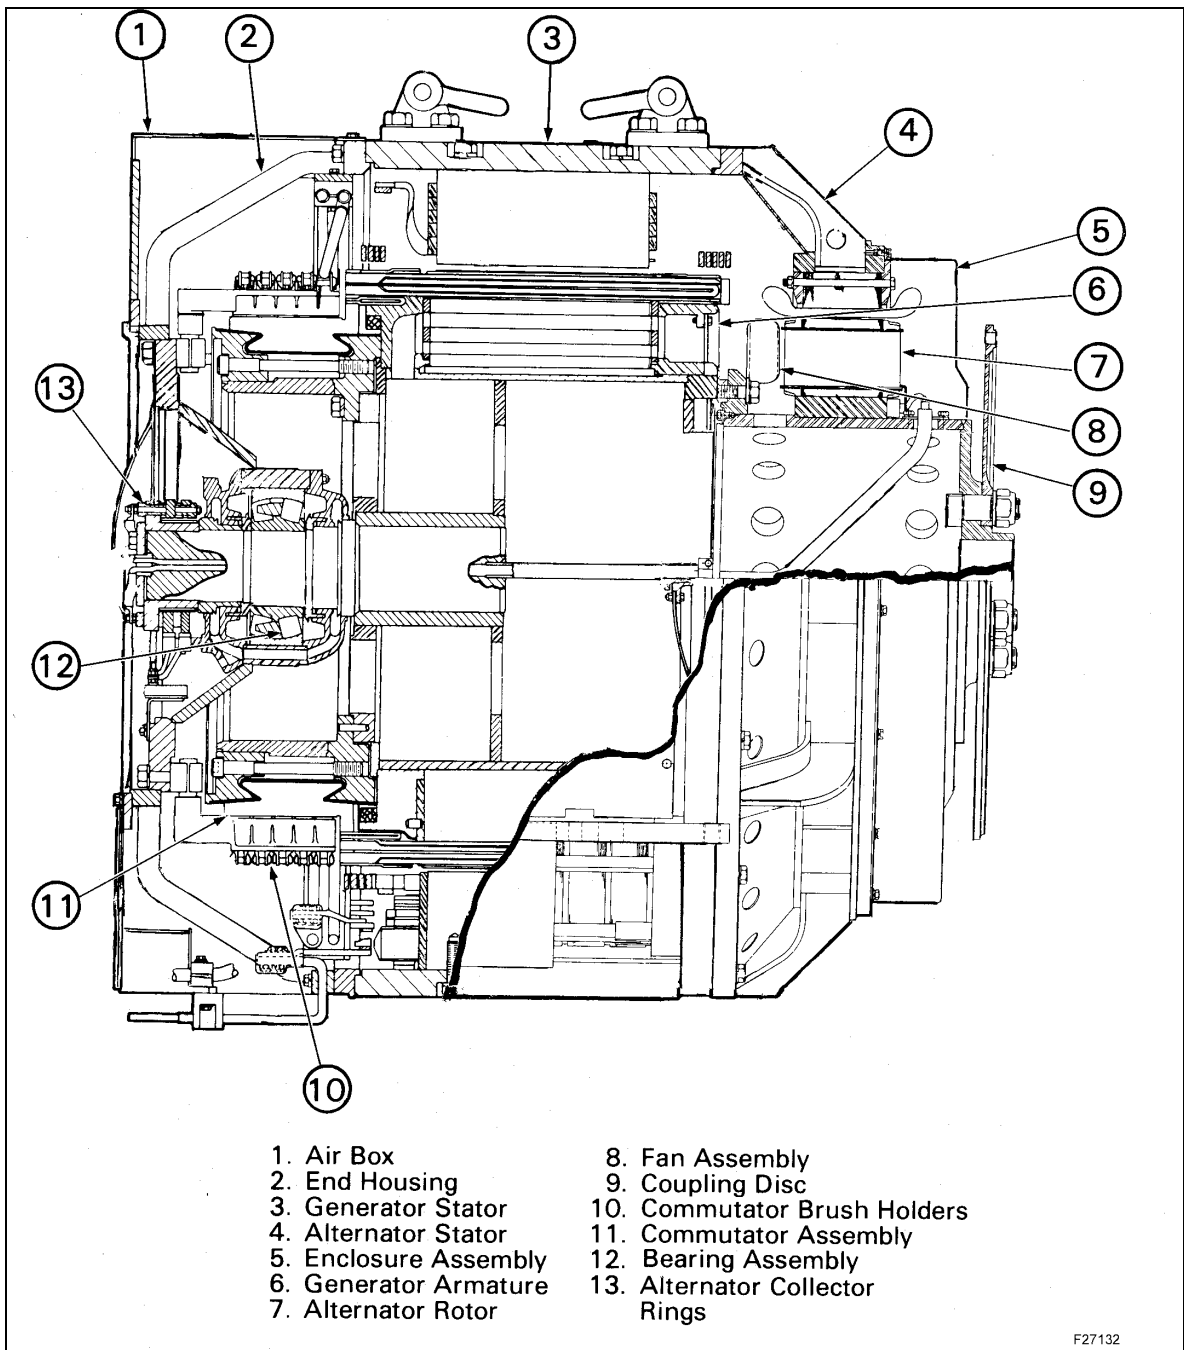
Typical DC Generator/CA Alternator Assembly, Cross-Section
